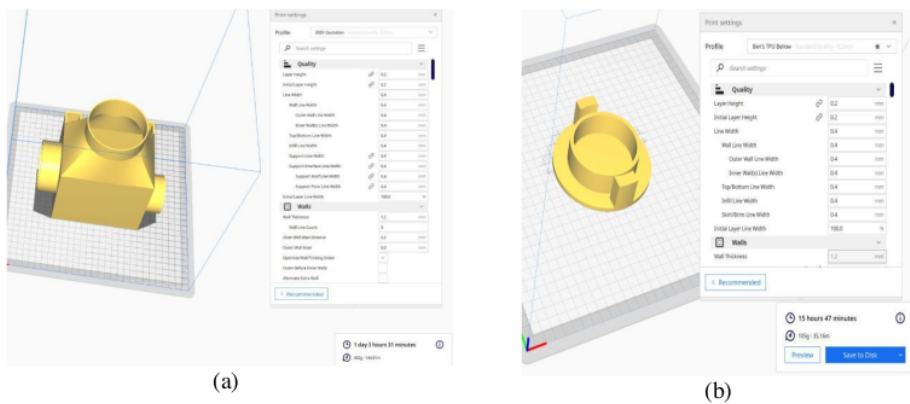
3D printed parts; (a) Filter body, (b) Cap
